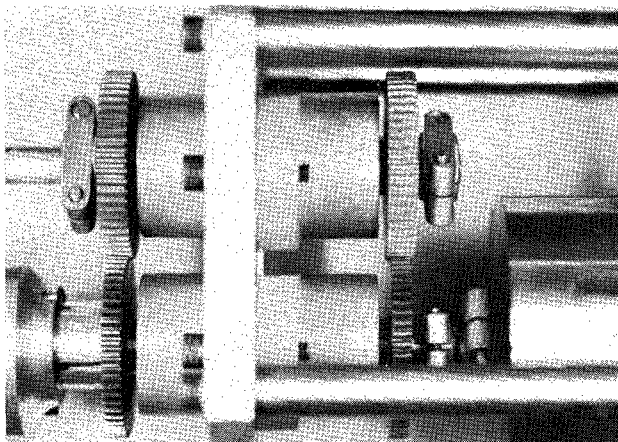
The in situ coated gears assembled in the four square gear tester, before the test.
